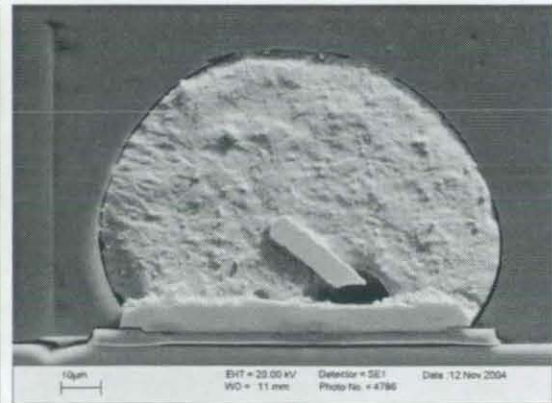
Ag_3Sn IMC and hole in the Sn-Ag-Cu solder bump.
